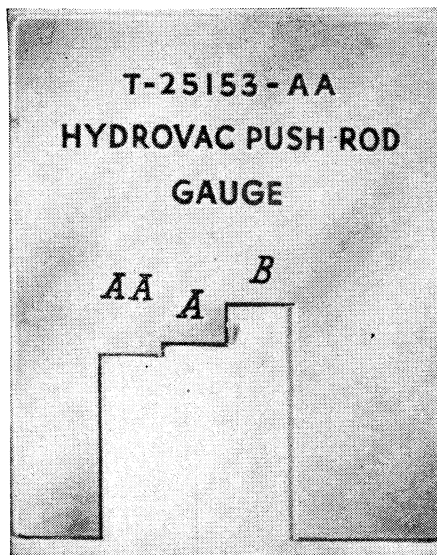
Use step "AA" in gauge to check push rod for Hydrovacs with  $\frac{1}{16}$ " groove in center plate. Step "A" to check push rod for First Series Hydrovacs without groove in center plate. Step "B" is for Second Series Hydrovacs
